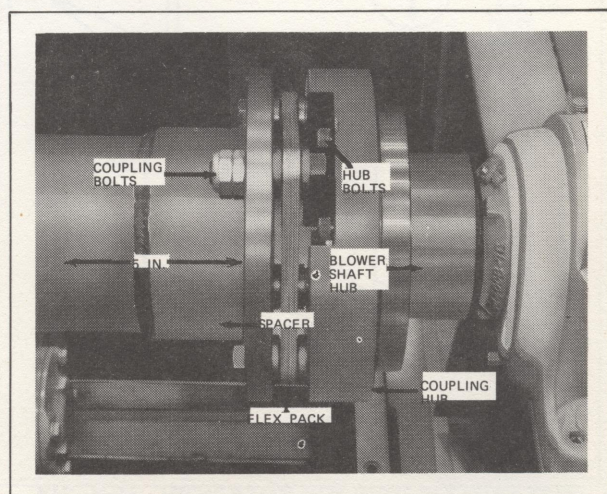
EQUIPMENT BLOWER FLEXIBLE COUPLING.
